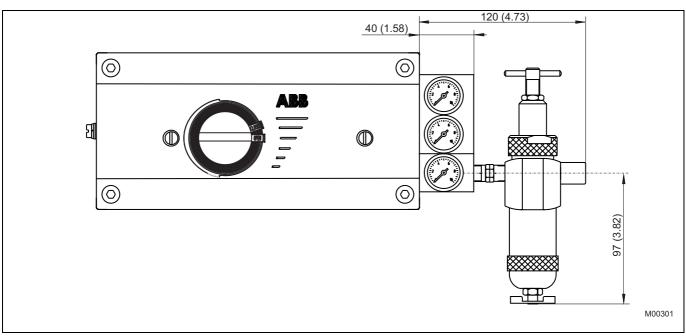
Positioner TZIDC-210 with pressure gauge block and filter regulator
